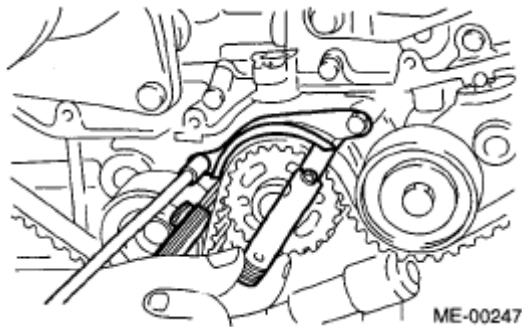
Locating Timing Belt Guide Mounting Bolts
